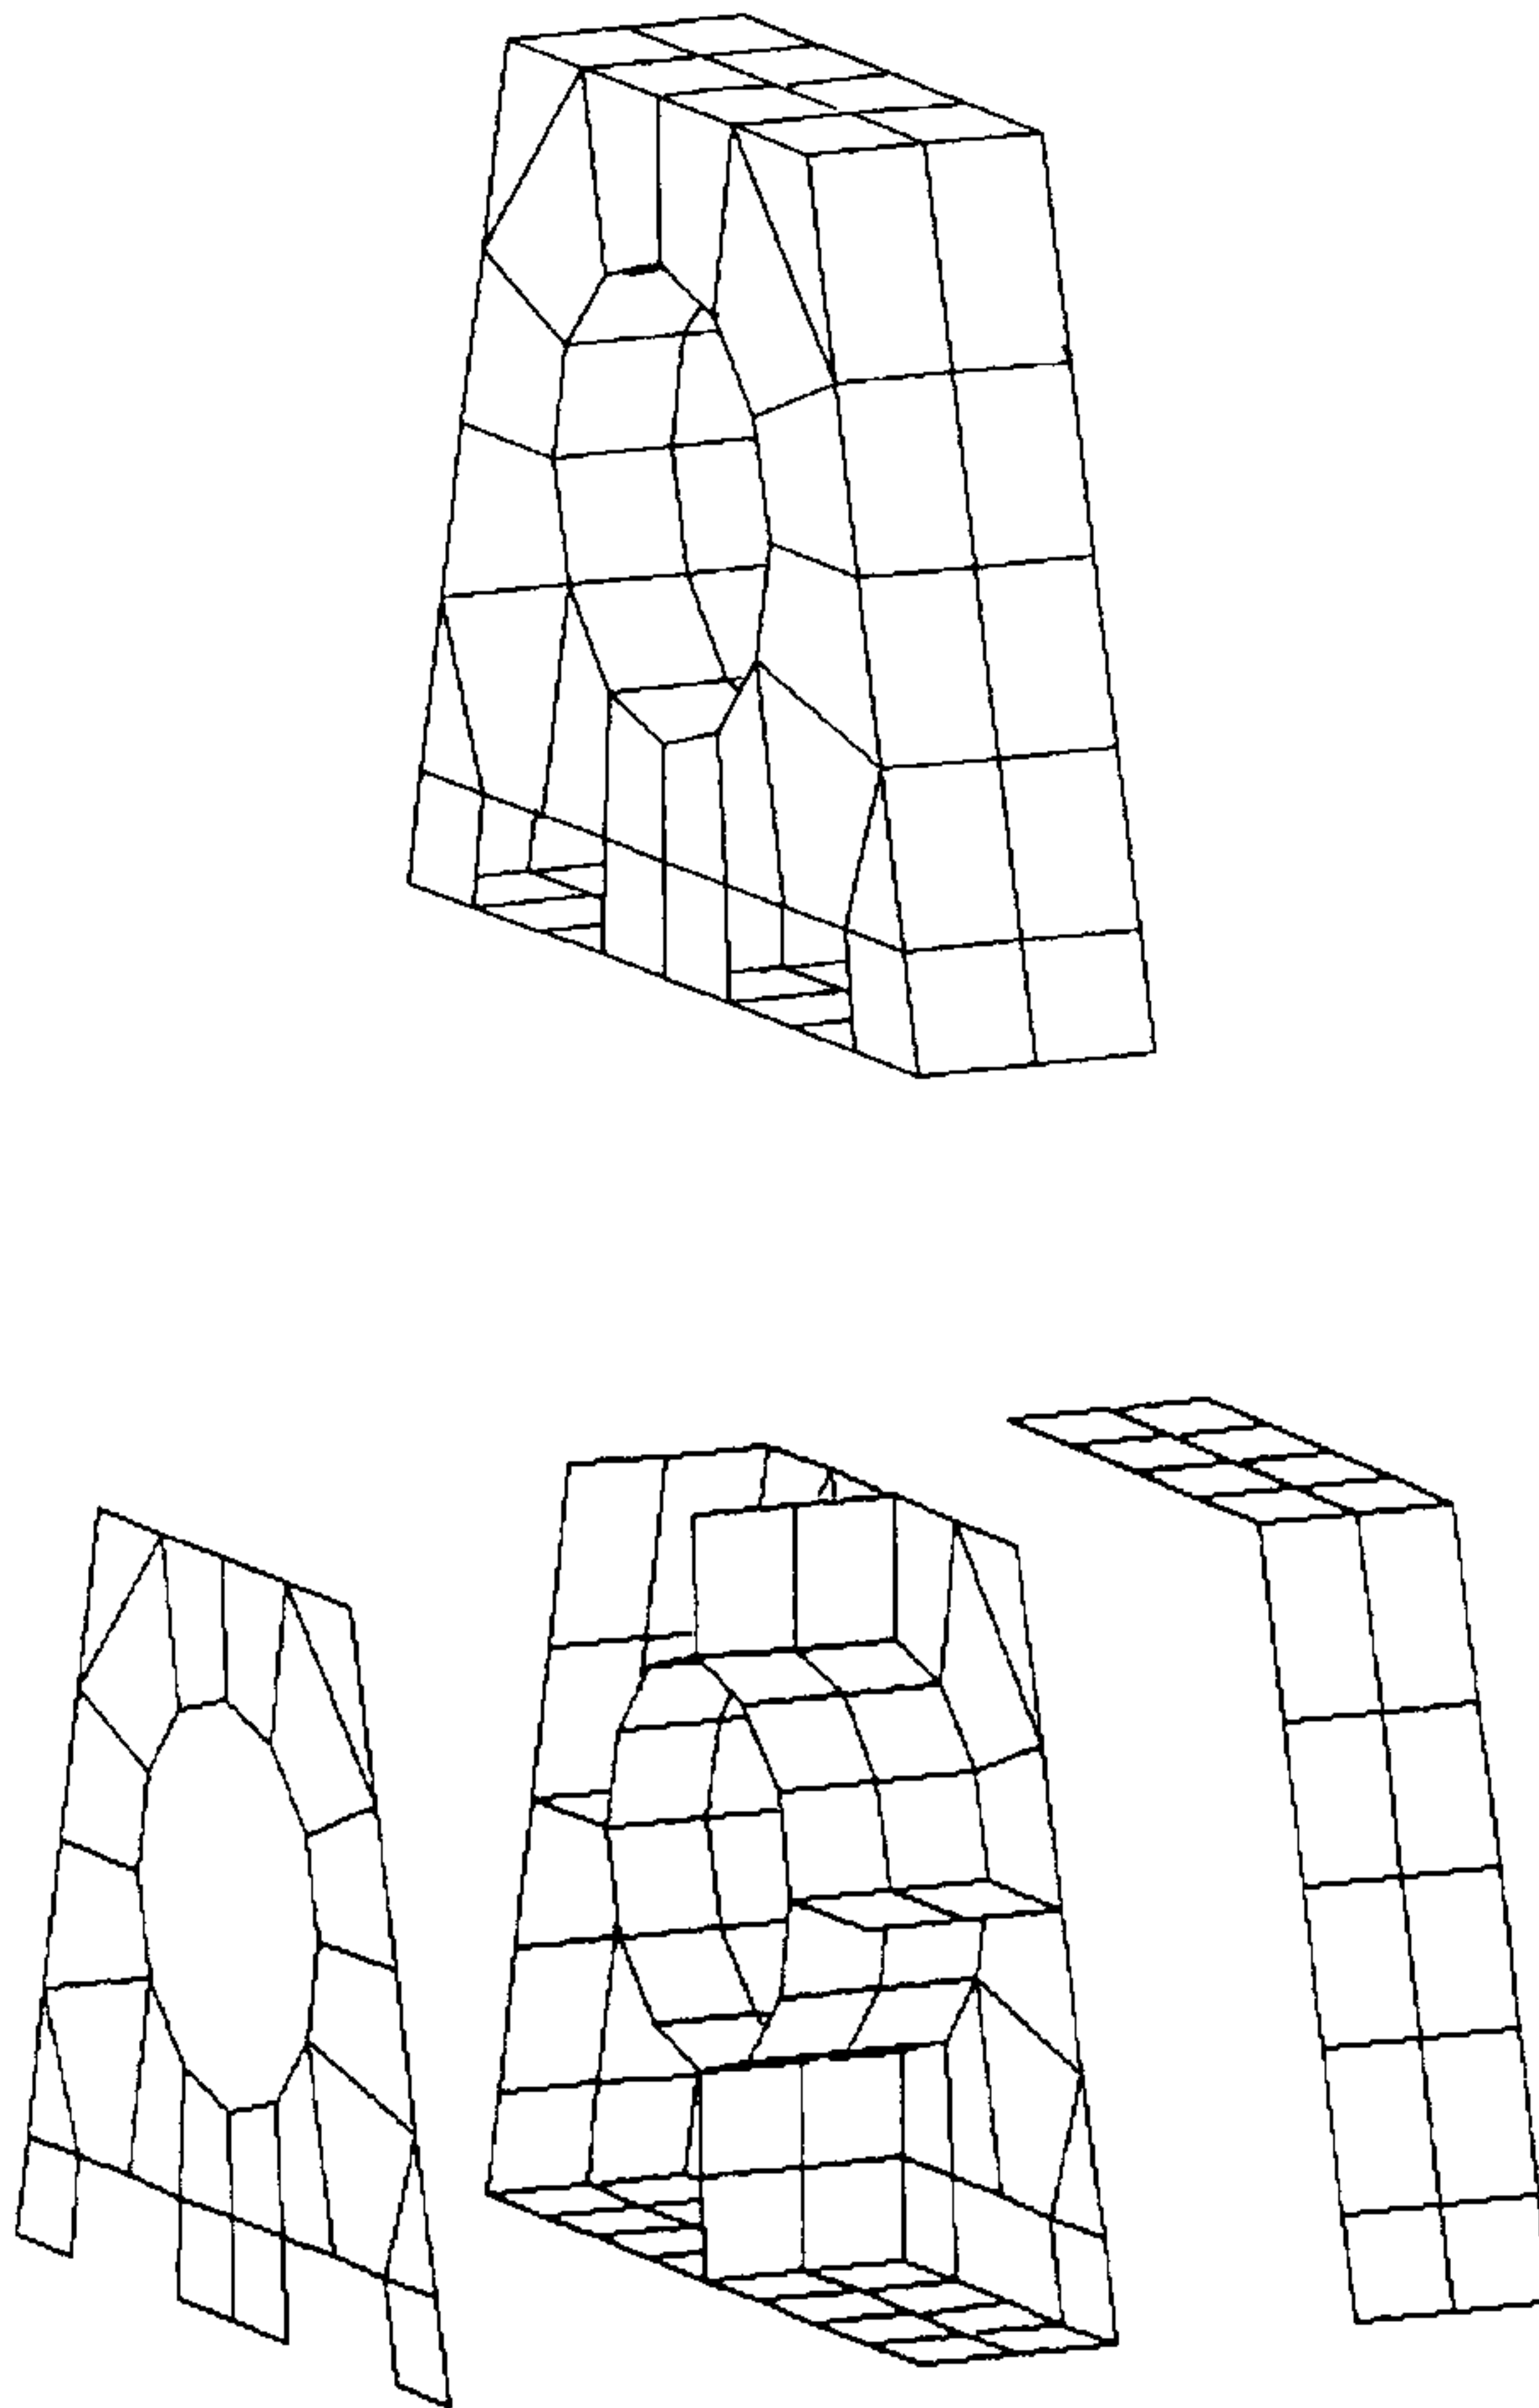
Exterior and exploded views of one pillow block, which bolts to the top of each fork tine. Bolting access holes are provided near the bottom of the large vertical plates. All plate elements in the model were 1/2" thick except the axle support tube (2.25") and the bottom plate, made 2.75" thick to represent the combined thickness of the pillow block bottom plate and tine top plate.
